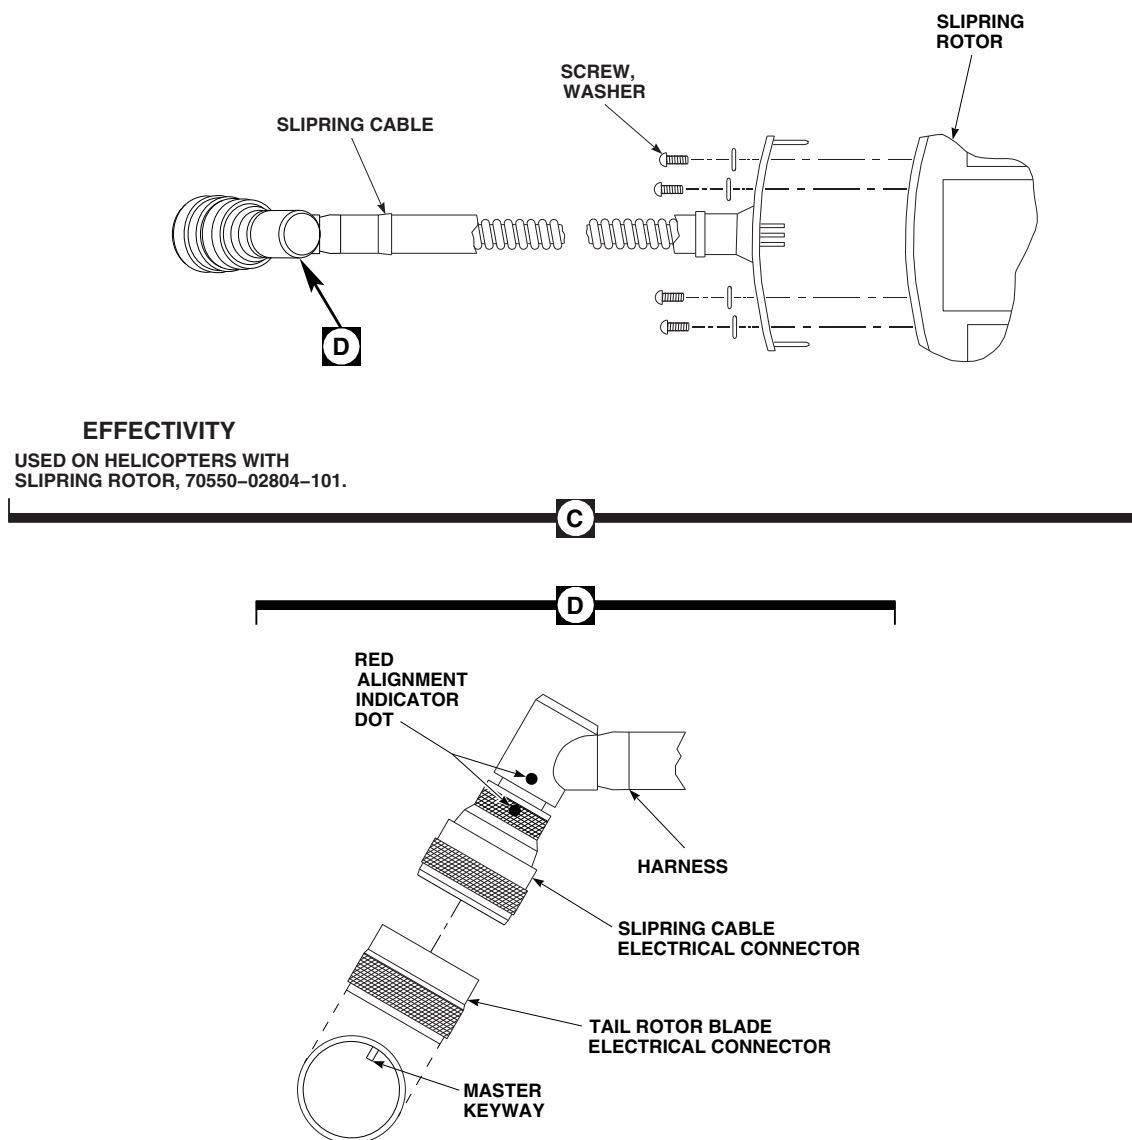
REPLACE TAIL ROTOR BLADE DEICE SLIPRING ROTOR (SHEET 2 OF 2)
